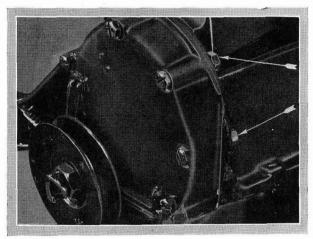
The location of the two  $\frac{1}{4}$  in. bolts with retaining nuts at the back of the engine bearer is here shown.
